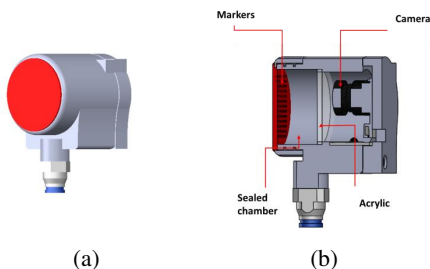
PnuTac sensor. (a) Sensor assembly. (b) Cross-sectional view of sensor prototype.
